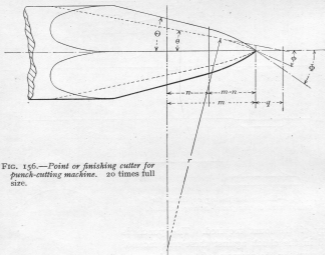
Point or finishing cutter for punch-cutting machine. 20 times full size.
